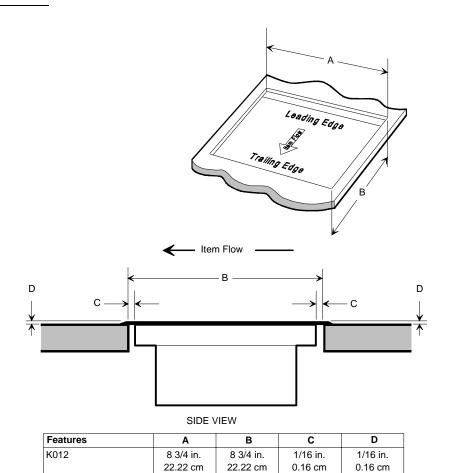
Checkstand Hole -7880-1000/3000 Scanner Horizontal Mount
